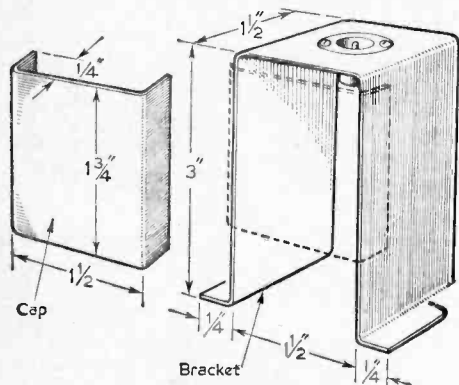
The mounting bracket for the coaxial socket in the R.F. stage.
